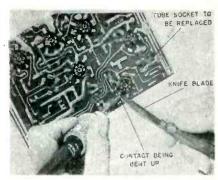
Removal of tube sockets mounted to wiring side of board by bending up the socket contacts.
